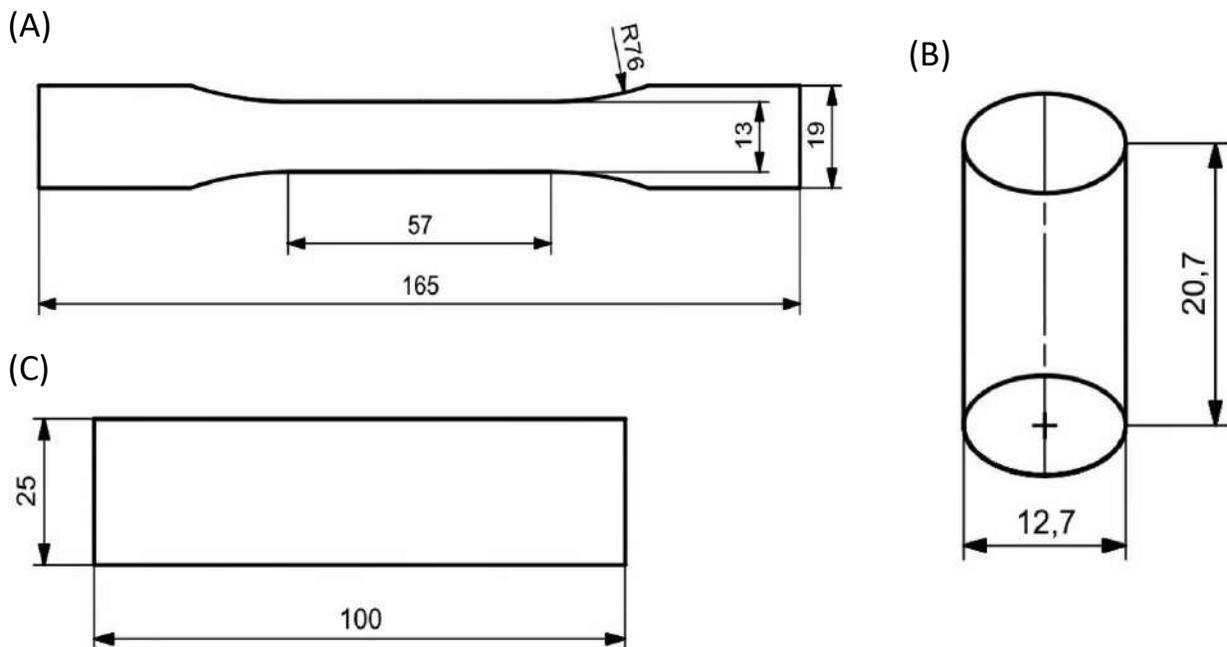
Samples design for mechanical testing. (A) Sample design for tensile test – ASTM D638. (B) Compression sample design – ASTM D695, and (C) Bending sample design – ASTM D790. (All dimensions expressed in mm).
